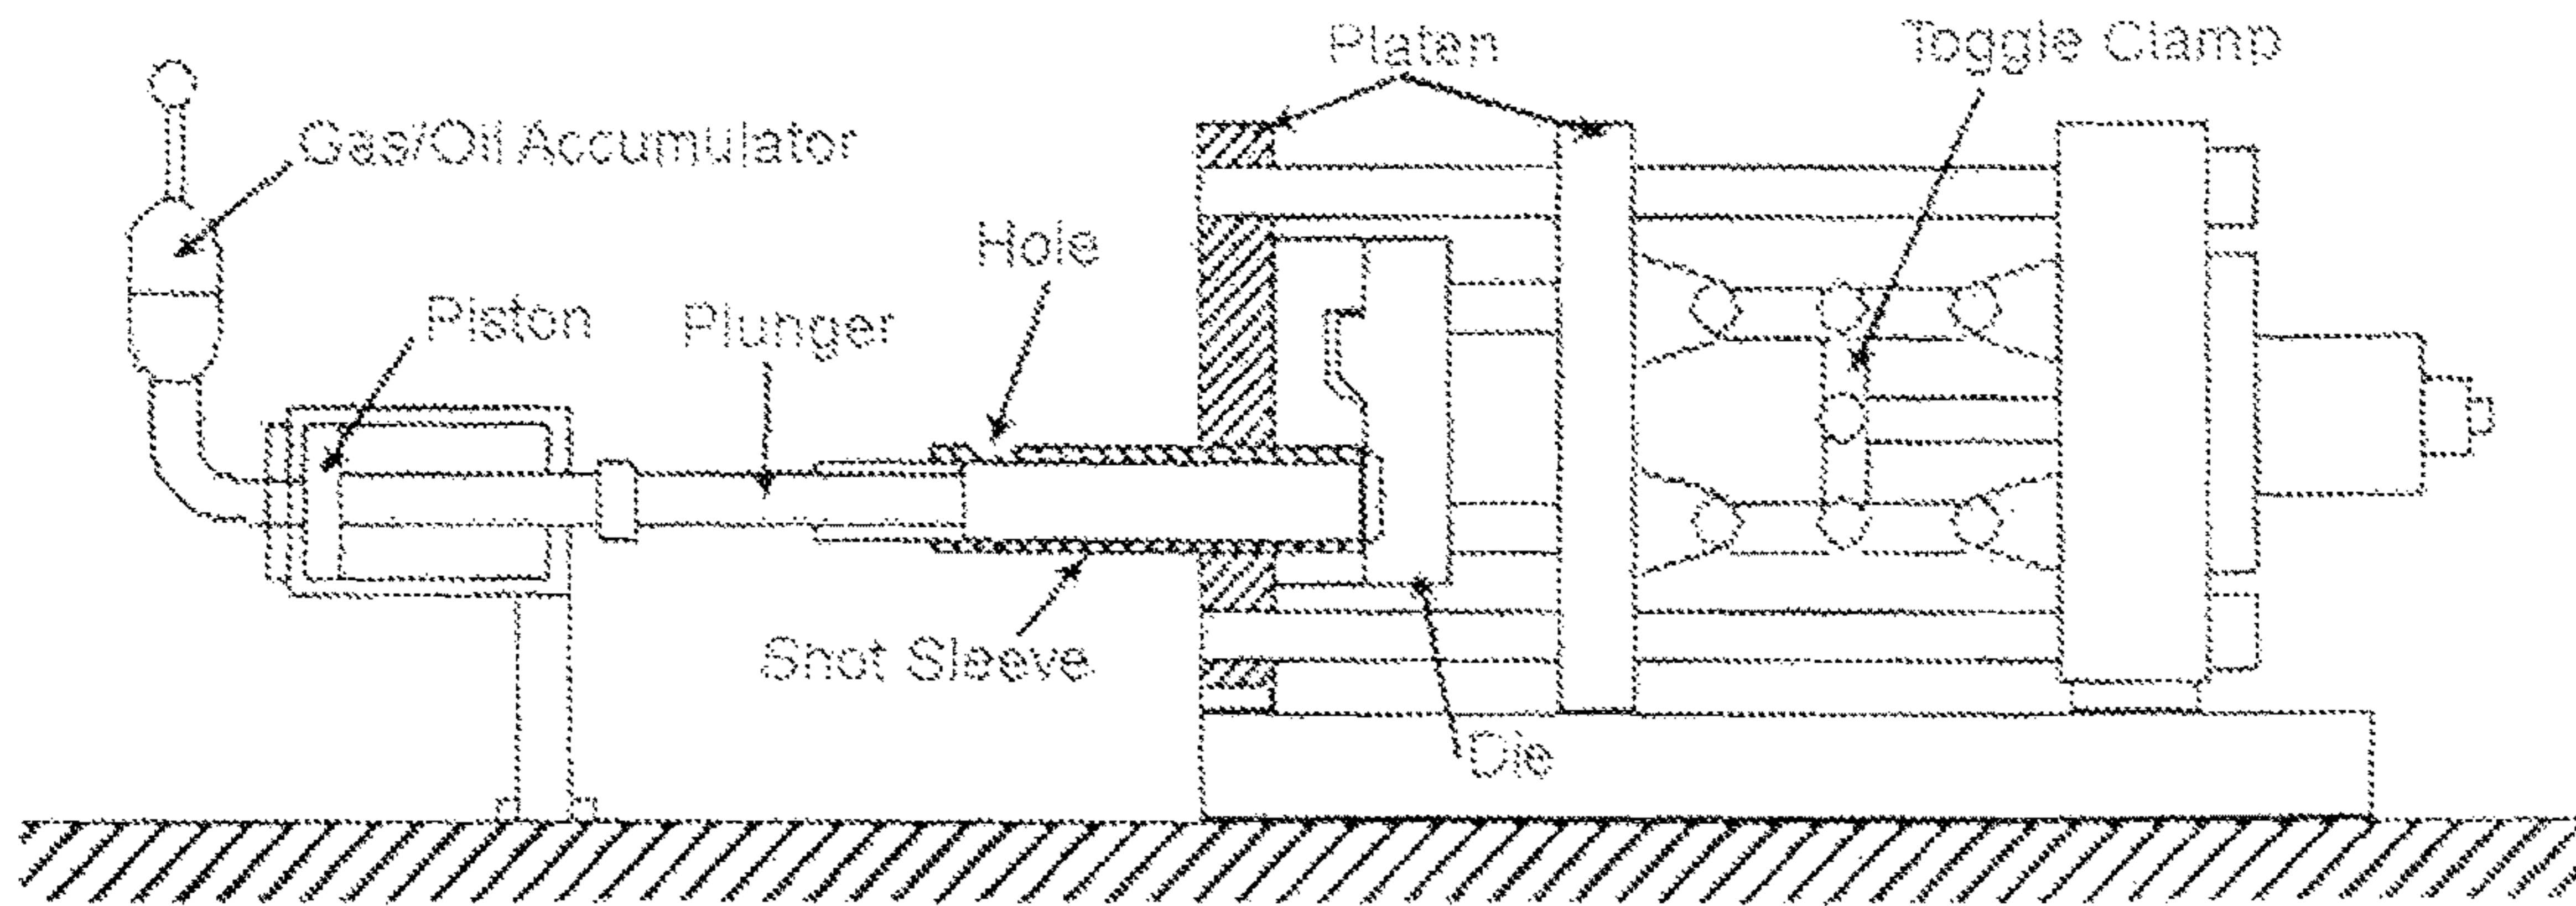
Cold Chamber Die Casting Machine (Prior Art)
